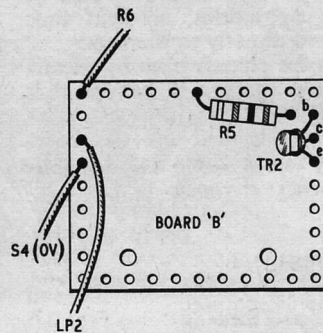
Assembly and wiring detail of pulse generator lamp amplifier (Board 'B'). Clad Veroboard is used for this with none of the copper strips cut
